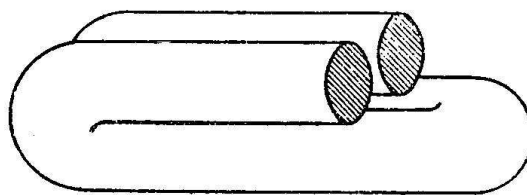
Cold bend test for rivet iron (Skelton 1924)
